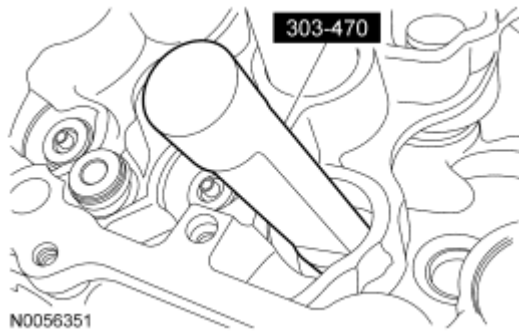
Installing New Valve Stem Seal Using Special Tool (303-470)
